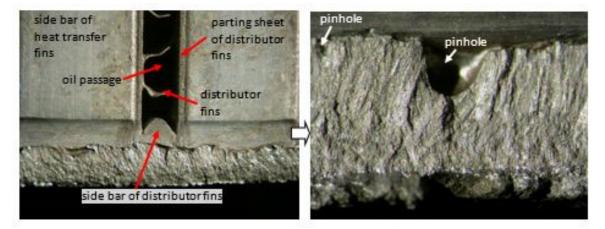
Surface fracture of the weld joint between header and side bar/parting sheet
